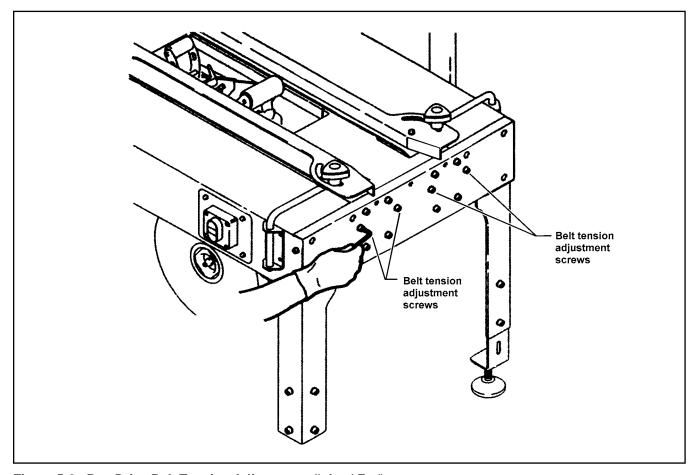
Box Drive Belt Tension Adjustment, (Infeed End)
